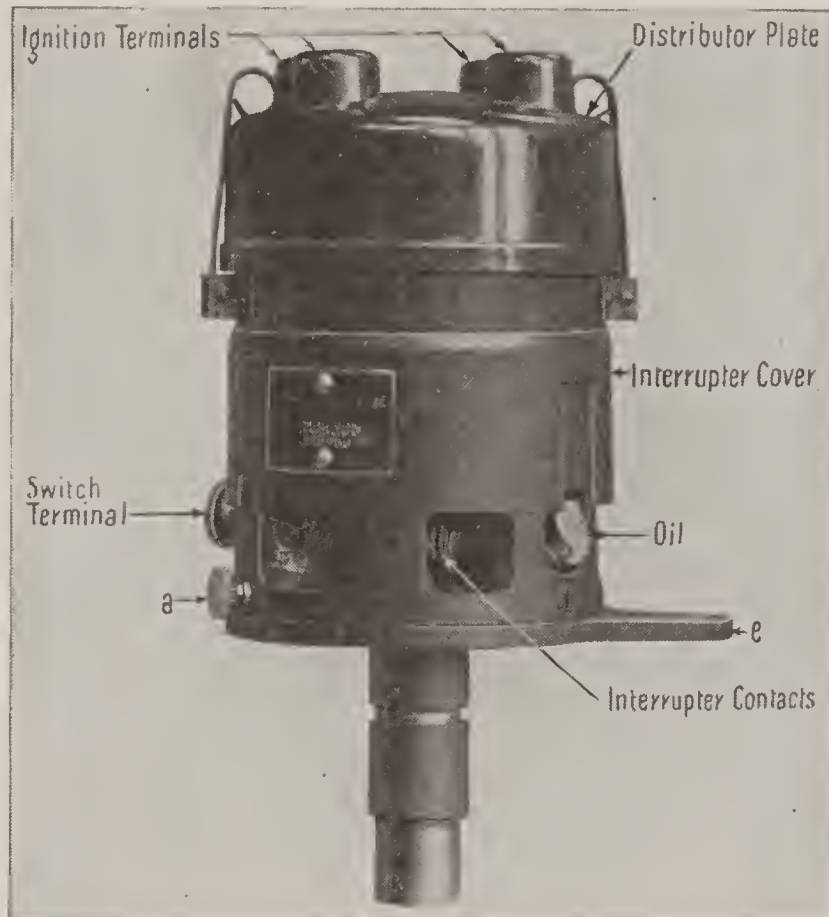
Westinghouse Ignition Unit with Interrupter Cover Raised Showing Interrupter Contacts
